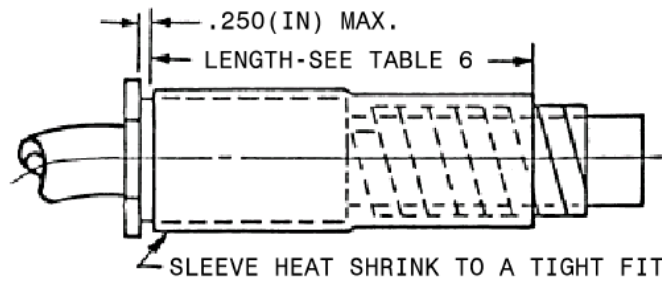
ABRASION SLEEVE ATTACHMENT /7/ /8/
